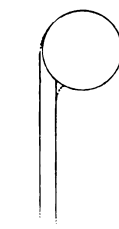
Showing How to Cut the Hole at the End of a Line.
